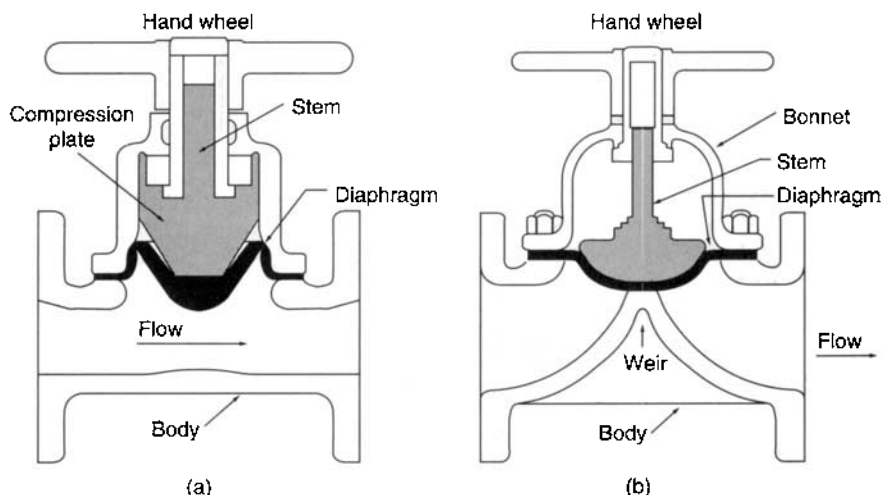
Diaphragm valves. (a) Straight-through valve in open position; (b) weir-type valve in closed position.
